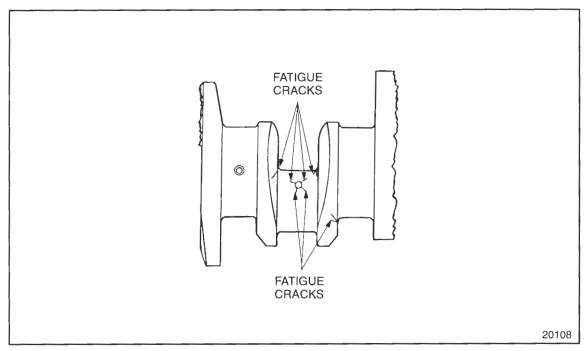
Crankshaft Fatigue Cracks
